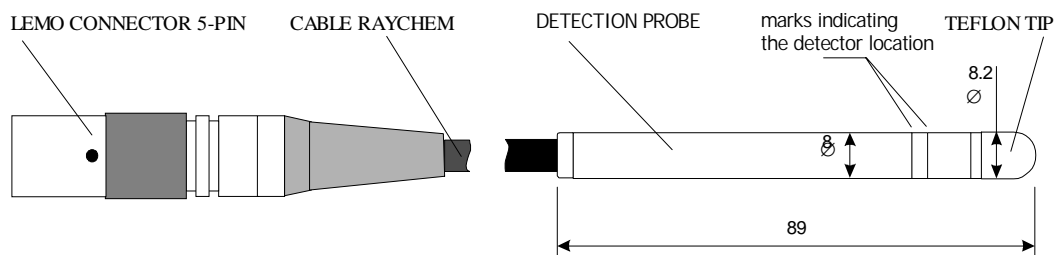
Schematic drawing of a SDP310Z20,60 detector assembly with cable connection (all dimensions in mm)
